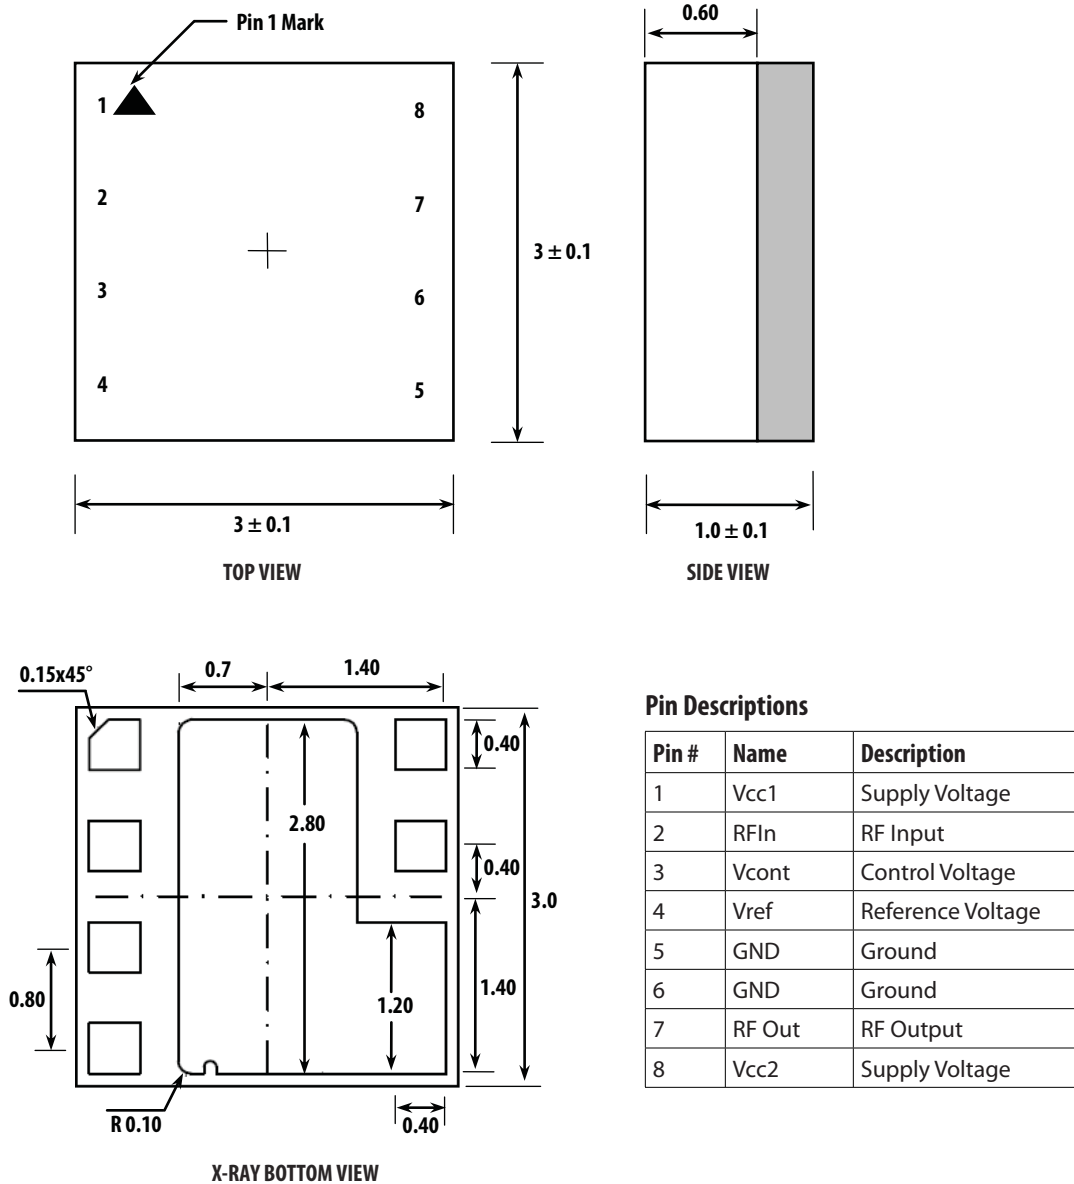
Package Dimensional Drawing and Pin Descriptions (All dimensions are in millimeters)
